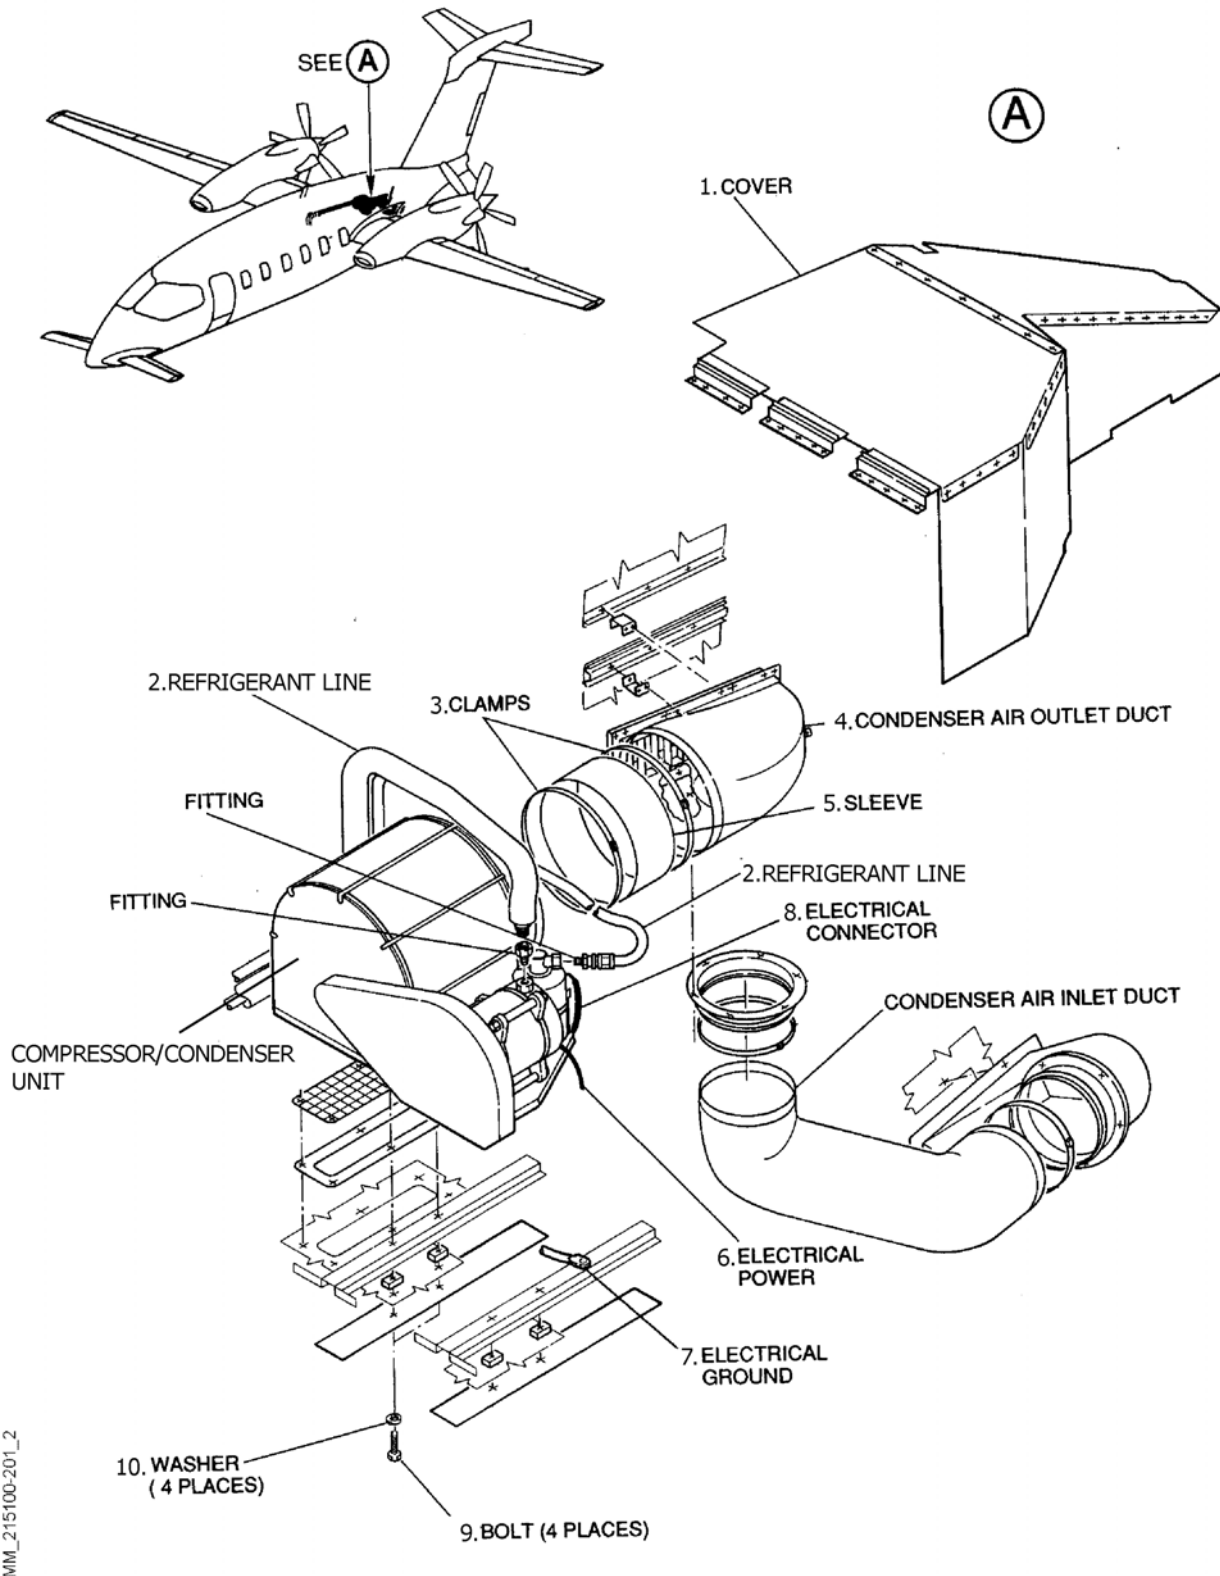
Compressor/Condenser Position "B"- Removal/Installation (Sheet 2 of 3)
